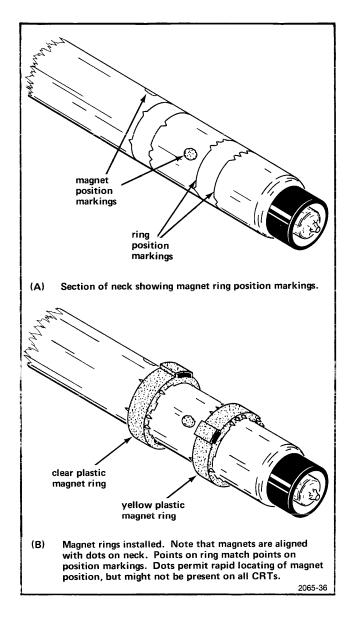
CRT Magnet ring location details. The magnet rings should be used only when supplied with the CRT.
